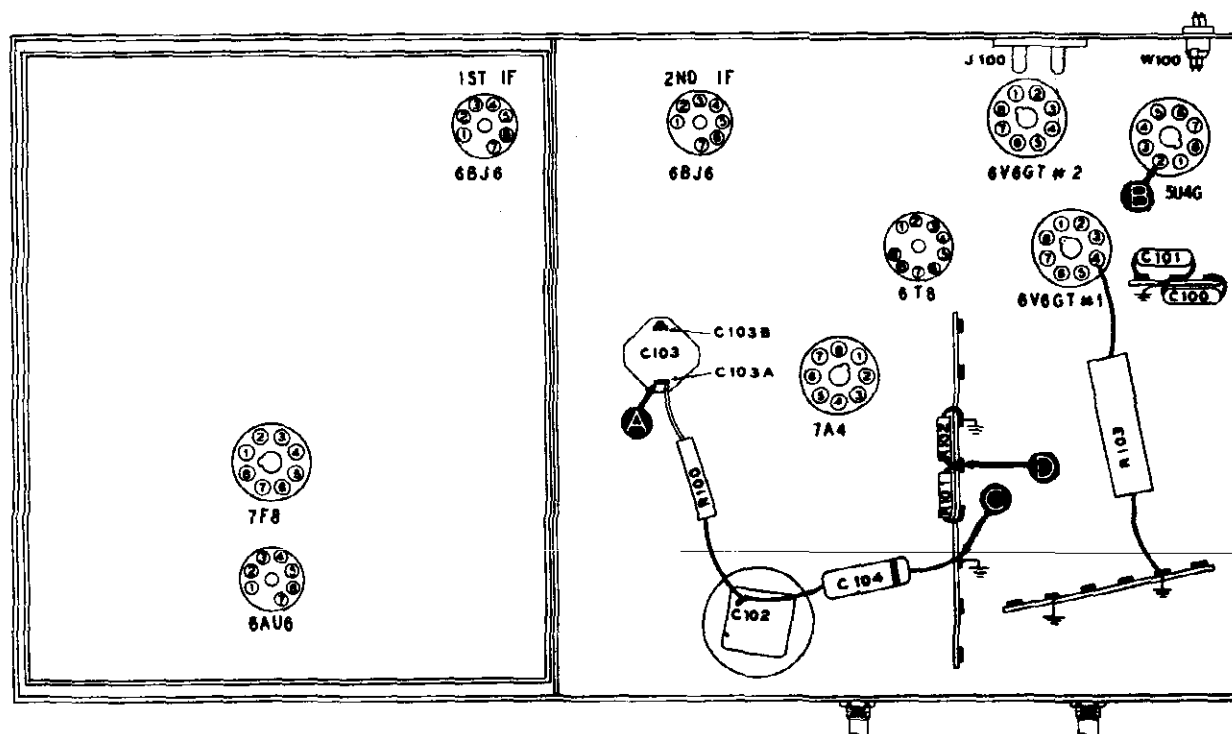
BOTTOM VIEW, SHOWING SECTION 1 TEST POINTS
